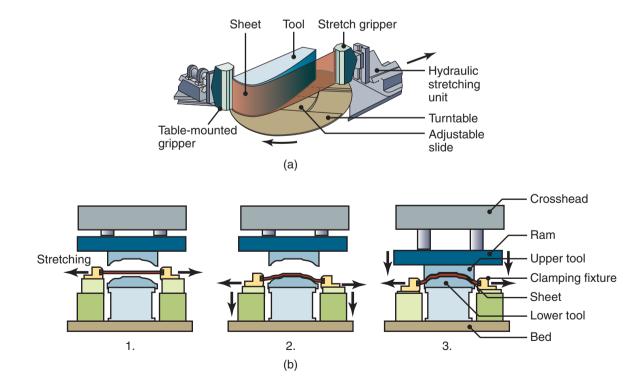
Schematic illustration of a stretch-forming process. Aluminum skins for aircraft can be made by this method. *Source:* (a) Courtesy of Cyril Bath Co.
